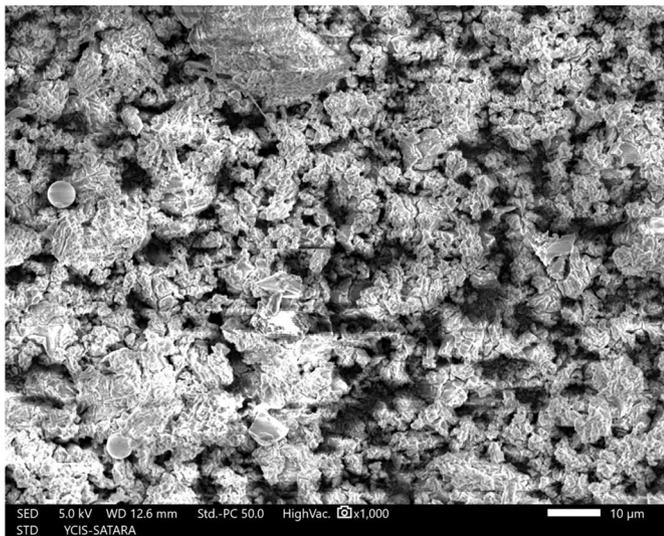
SEM of Machined surface after micro-EDM using AlCrN coated electrode.
